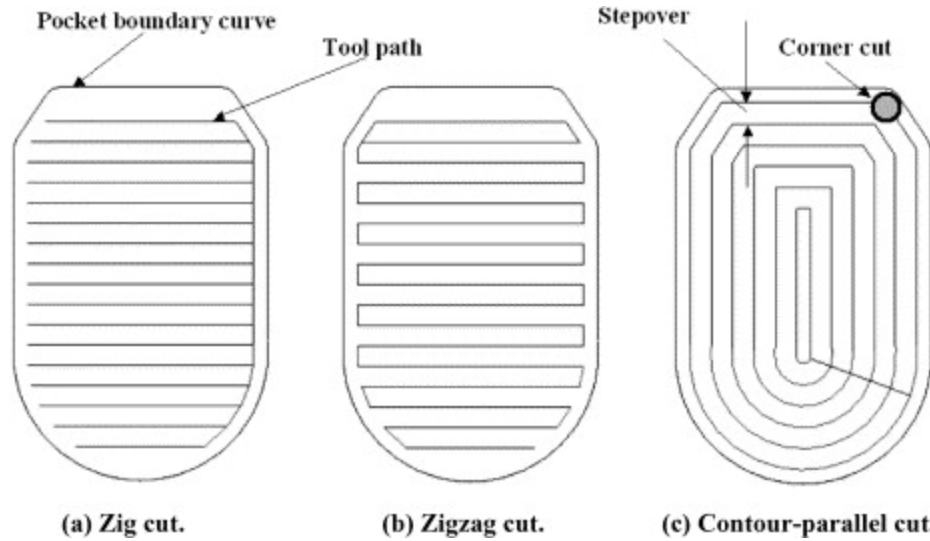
Example pocketing toolpaths. (a) Zig cut; (b) Zigzag cut; and (c) Contour-parallel cut [4].
